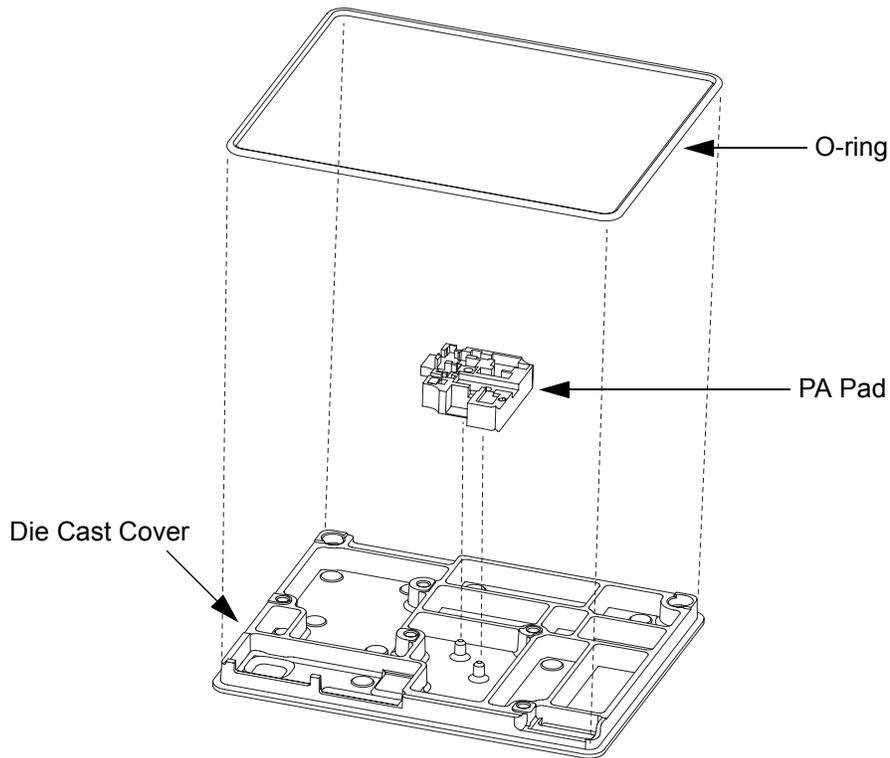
Assembling of PA Pad and O-ring (VHF models)
